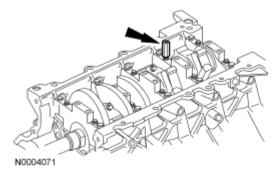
Locating Pickup Tube Spacer Courtesy of FORD MOTOR CO.
